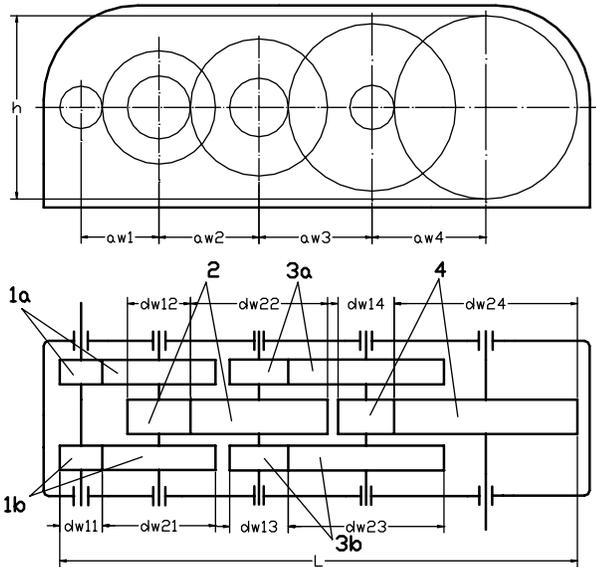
Calculating schema for four-step helical gearbox with first and third step double gear-sets
